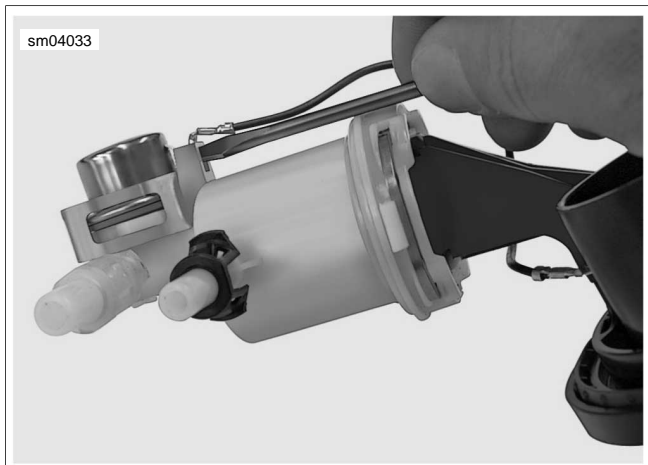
Remove Ground Wire Spade Terminal From Fuel Filter Shell
